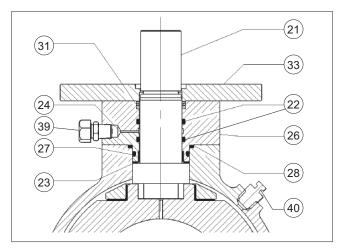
View of triple barrier stem seal arrangement on Class 150 & 300 rated valves
